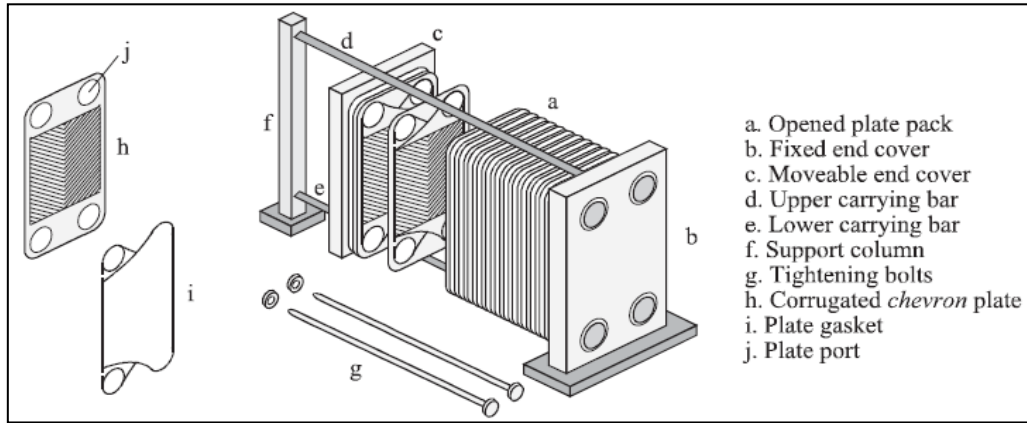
Design of the heat exchanger, exploded view of a BPHE.
